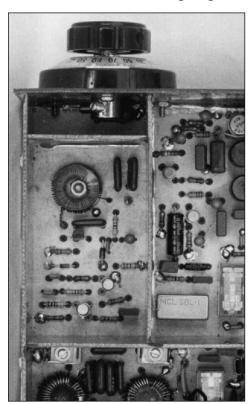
Detail of top view with C58 removed to show mounting arrangements
